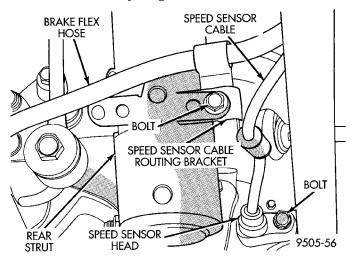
Speed Sensor Head Mounting And Cable Routing
